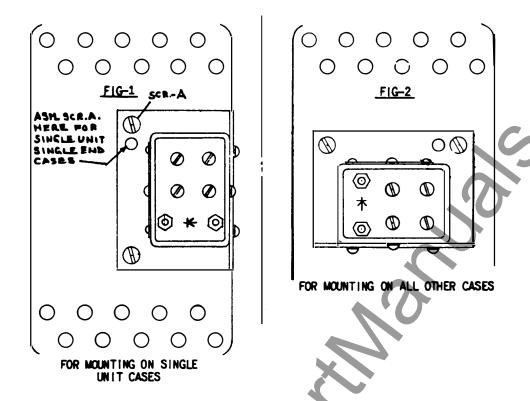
(0104A8523-3) Mounting Position on Relay Case for Single Unit Tripping Rectifier.
